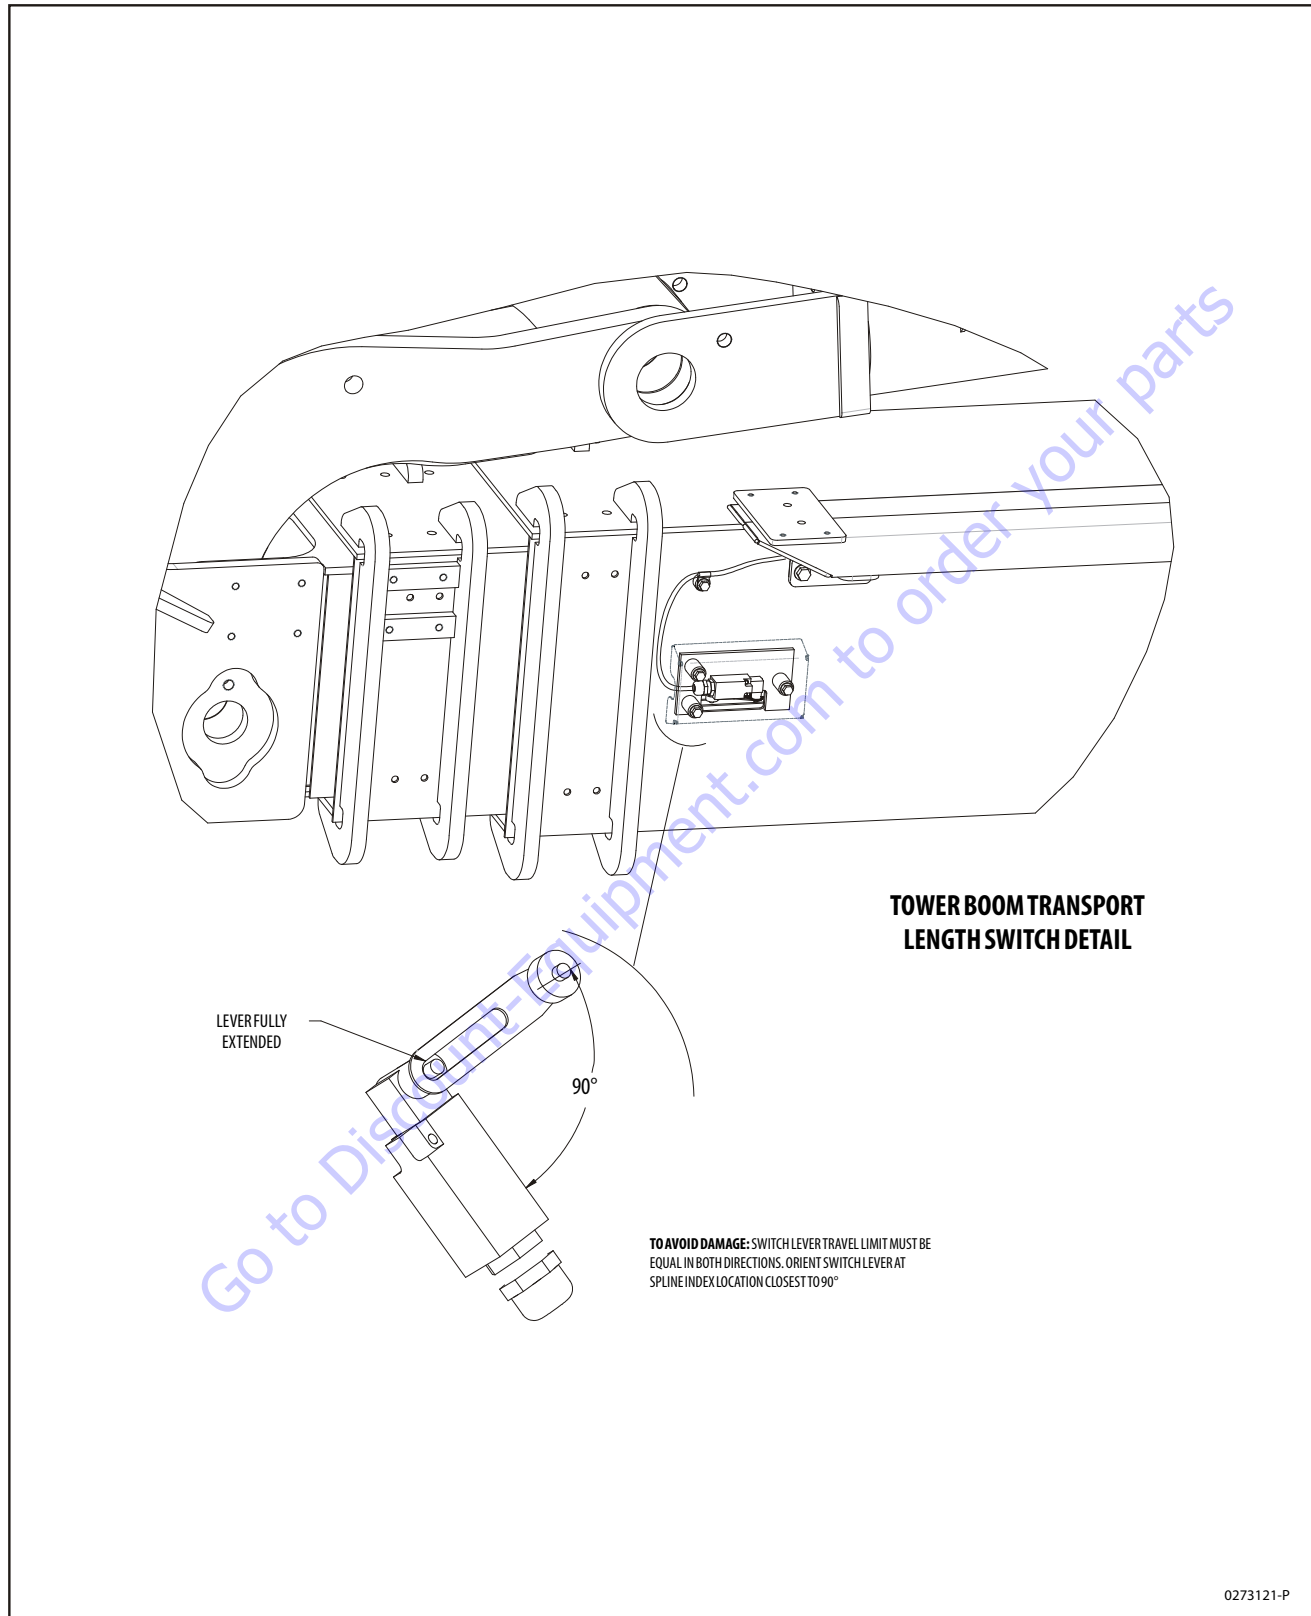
Boom Sensor Locations - Tower Boom Transport Length
